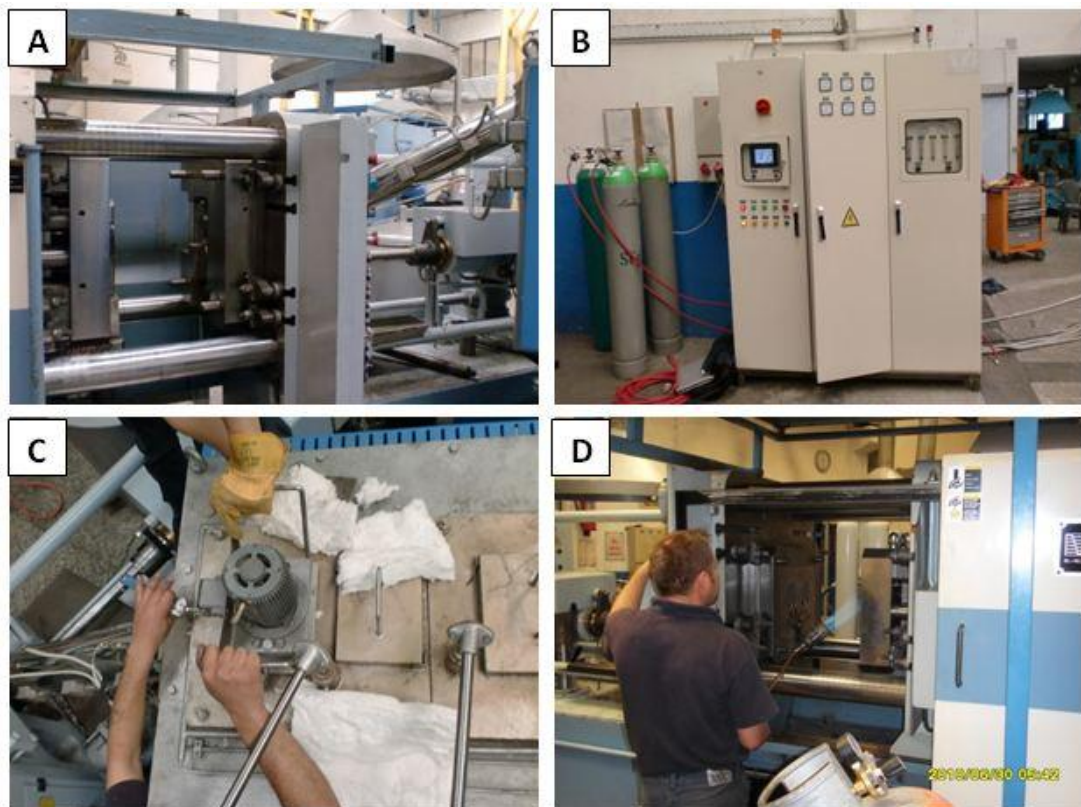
a- Die and transfer tube of furnace, 3.9: b- Control panel and protective gases, 3.9: c- Mounting of the dosing pump, 3.9: d- Heating the die
